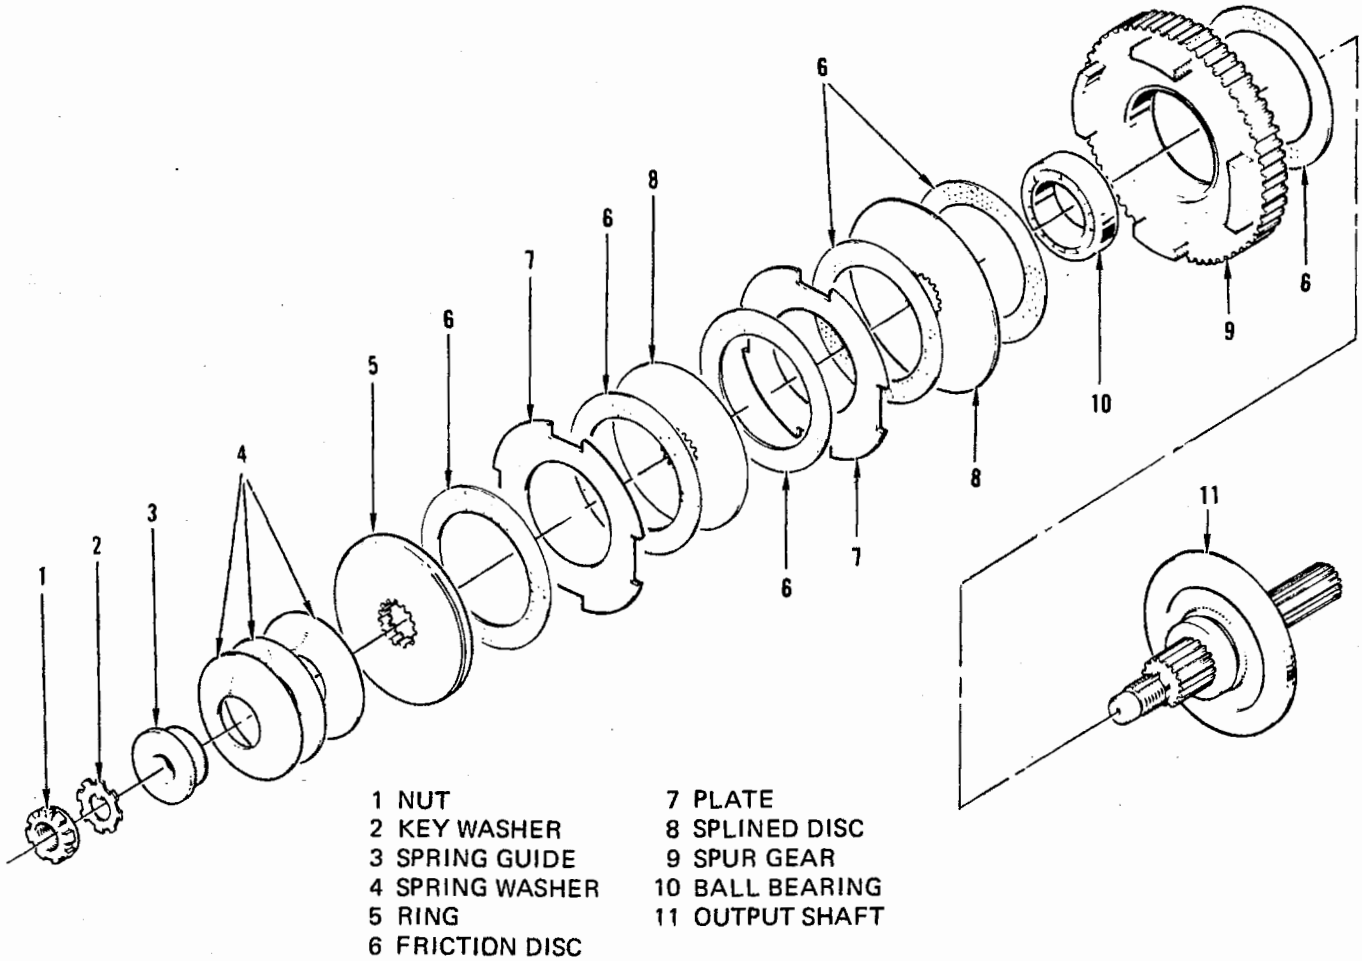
Yaw Damper Servo Actuator (56021-001) - Exploded View
